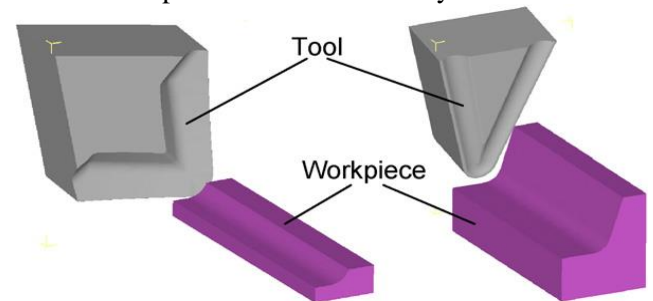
FEM analysis of of cutting tool geometry turning to the operation (tool geometry on the left - T1, geometry tool on the right- T2 [35])
